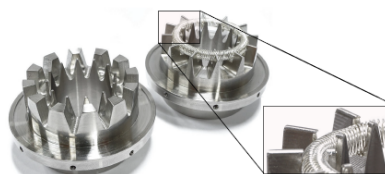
Gear-type bellows prototype: slider (left) and holder (right) parts, with the lodged coil spring in detail.
